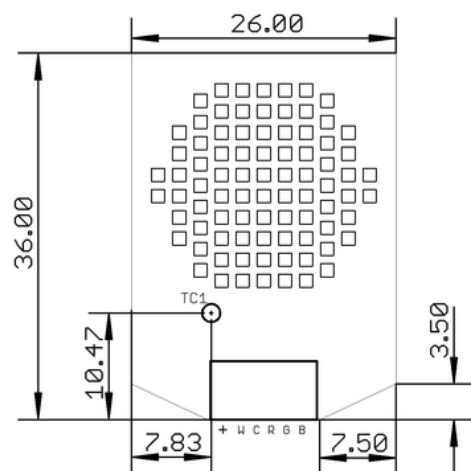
L5xxC-RGBxxxxy Mechanical Drawing
